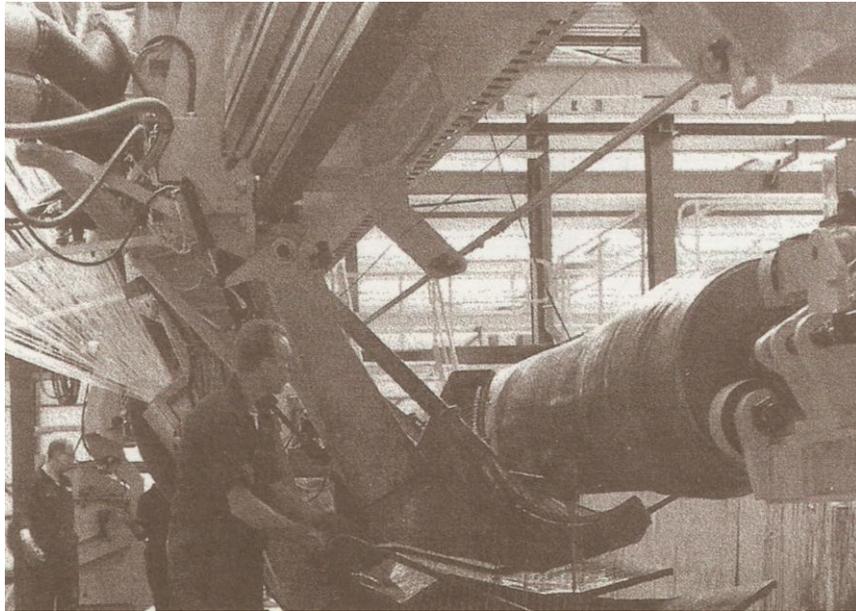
Filament winding machine with large diameter mandrel (courtesy of Owen (2000))
